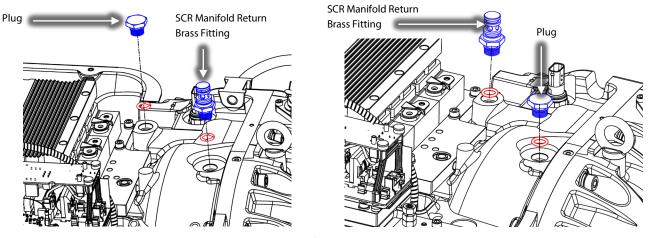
Plug and SCR Manifold Return Brass Fitting Locations
